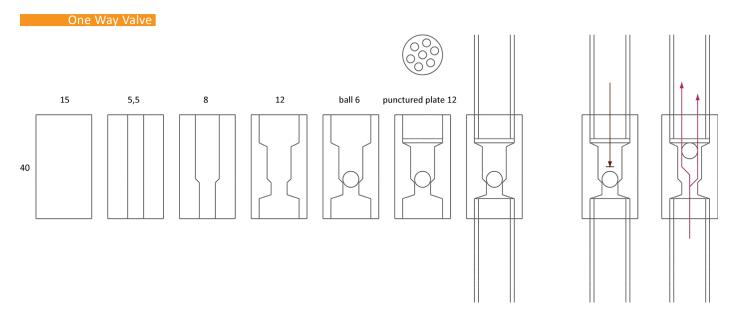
One Way Valve, using only lathing as a production process and works on gravity only. The numbers above are the diameters of the lathed holes.
